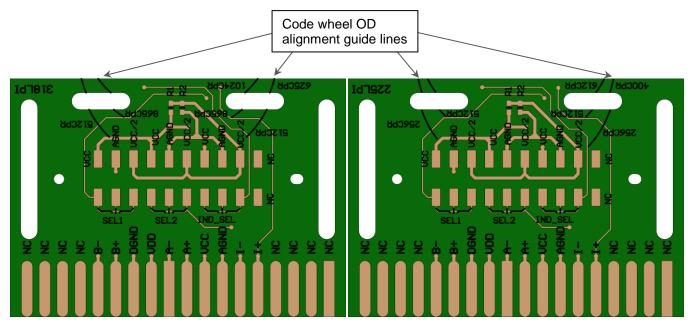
Top Side of the PCB (Left 318 LPI & Right 225 LPI)
